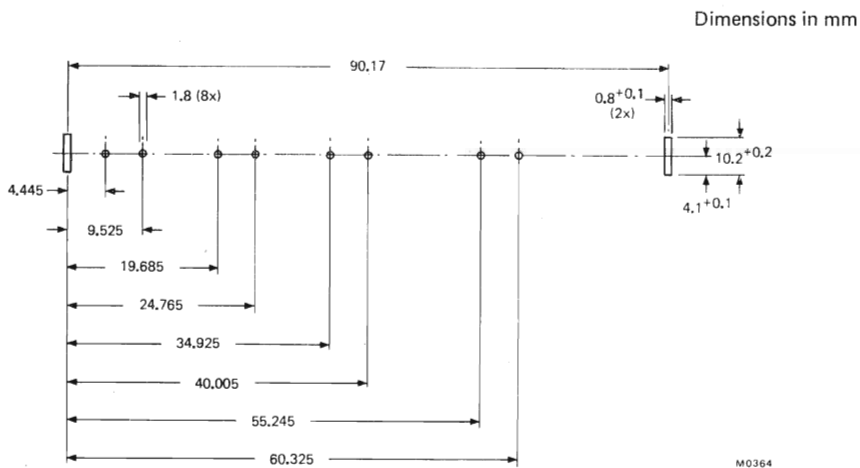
Piercing diagram viewed from solder side of board. Unless otherwise stated the tolerance is ± 0.05 mm.
